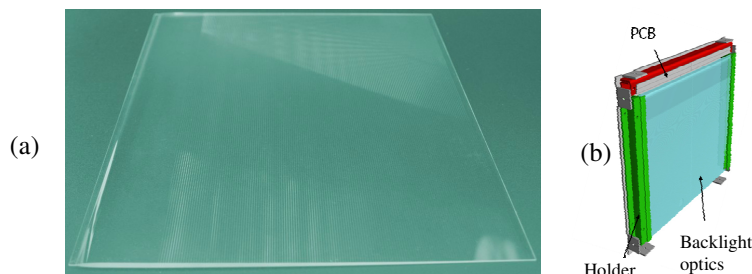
(a) Manufactured linear backlight. (b) 3D model of the manufactured prototype assembly.
